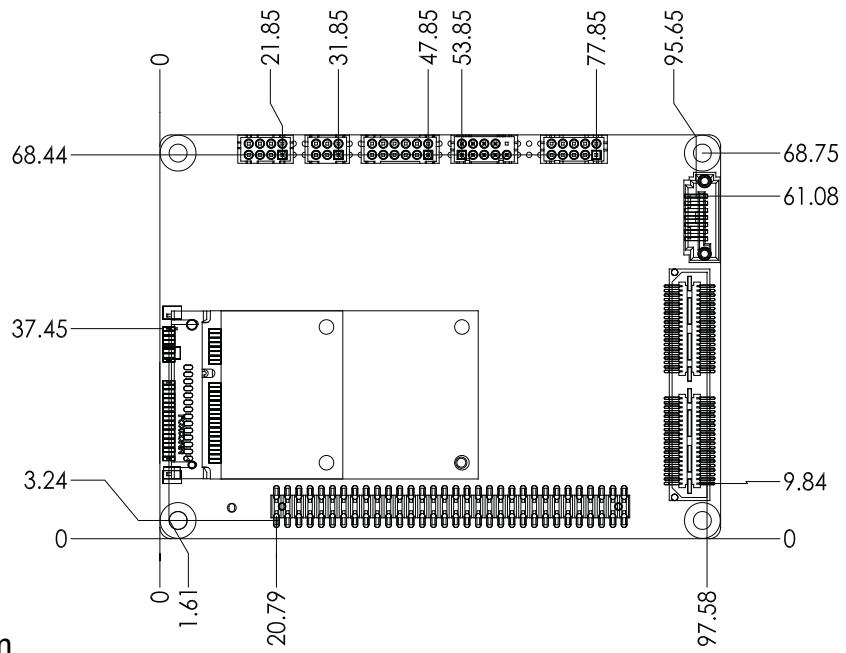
MIO-3260 Mechanical Drawing (Top View)
